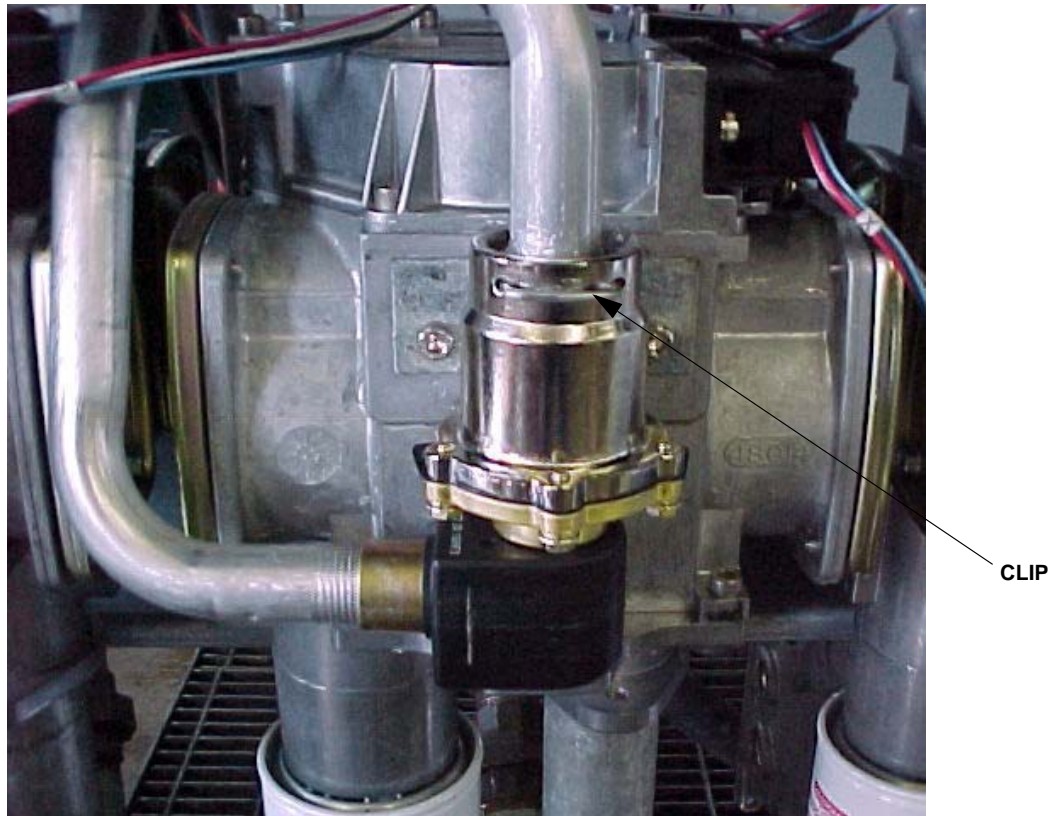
DOUBLE BUMP TUBE ASSEMBLED TO VALVE. *In 3/Vista dispensers, the proportional valve is located at the iMeter outputs.
